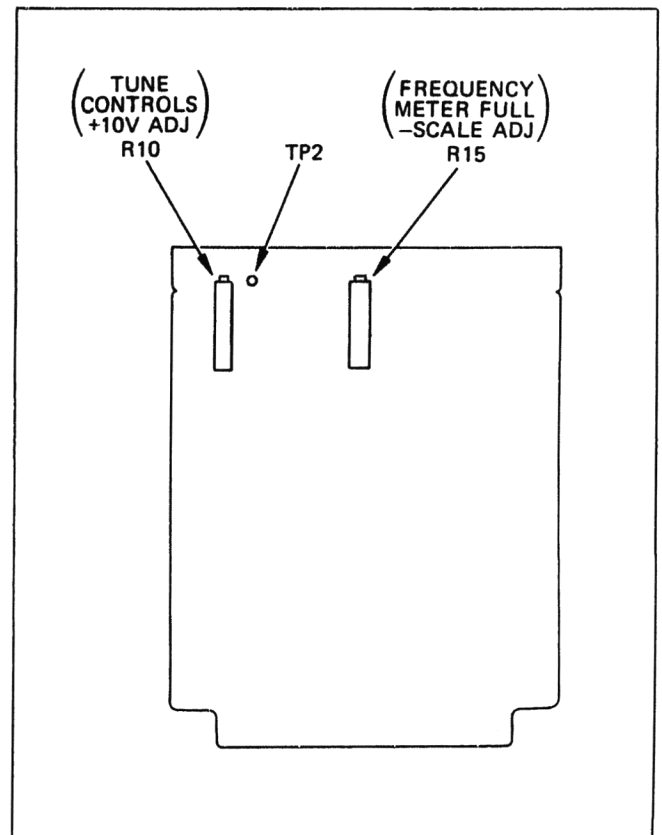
Trimmer Locations, Tuning Control Assembly, A29
